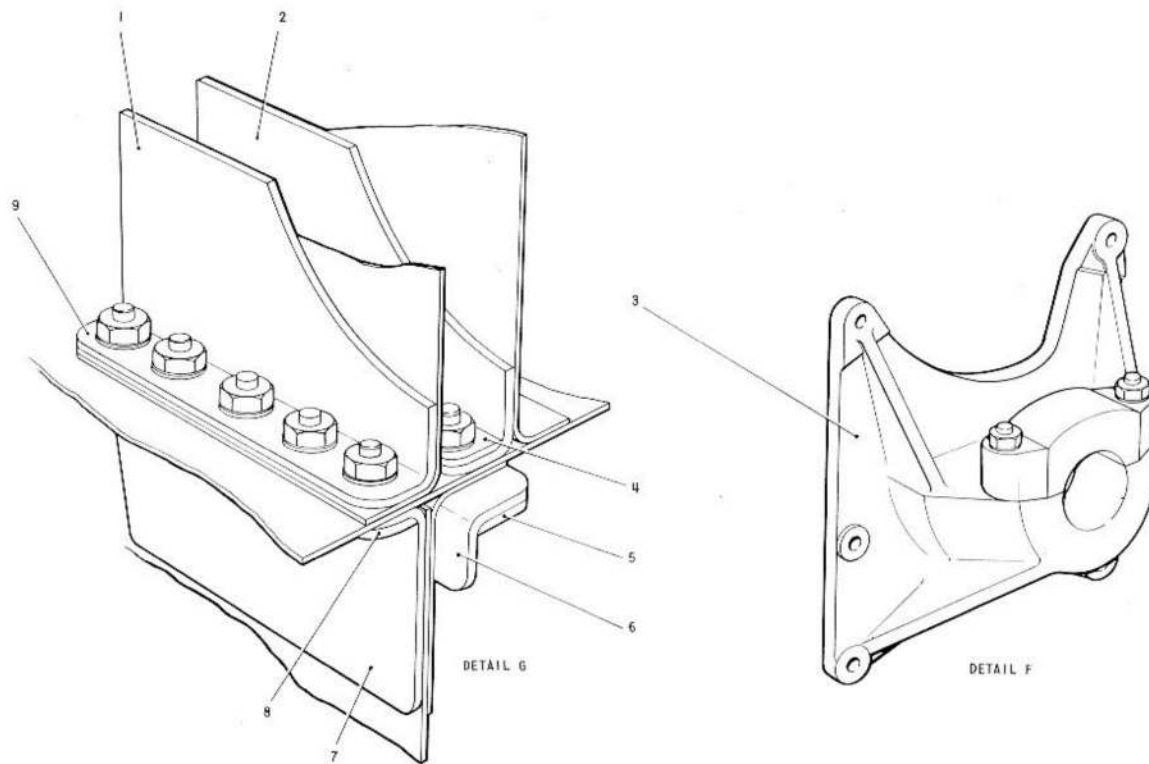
WING DETAILS INNER, ENGINE MOUNTINGS, AND RIB No.2, RIB C
